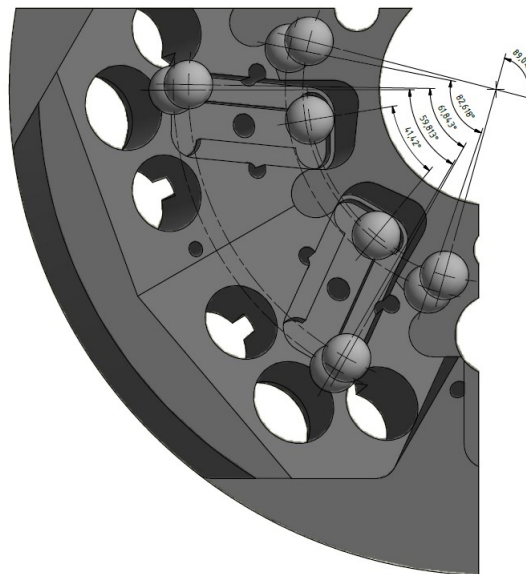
Technical drawing, by Harmen van der Meer, of the hexapod platforms, showing the different platform angles.
